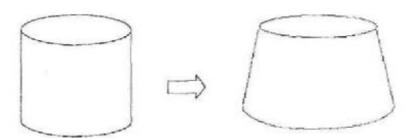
Schmeatic view of cone generation instead of cylindrical shape
